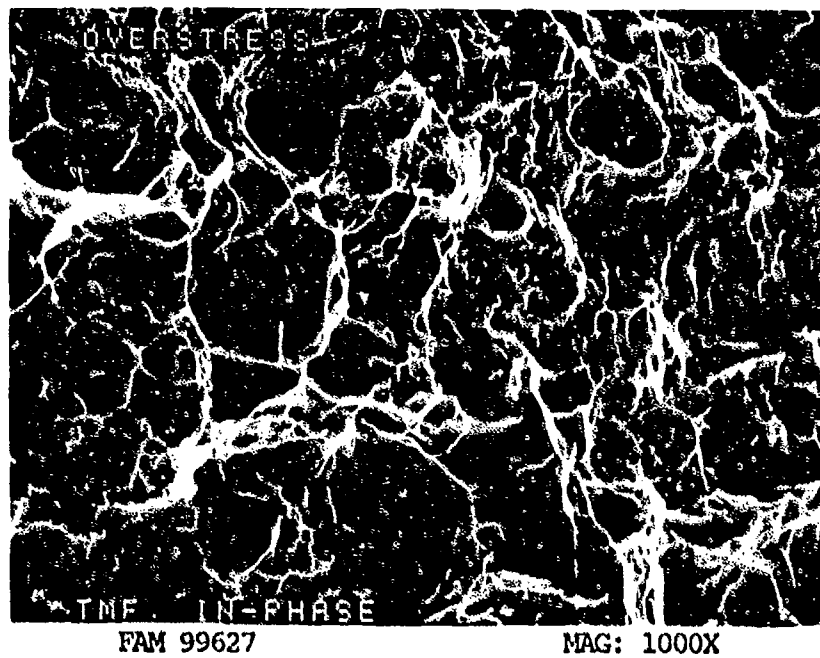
Higher magnification photograph showing dimpled overstress in the final fracture area. Fine dimples are contained within large ductile dimples.
